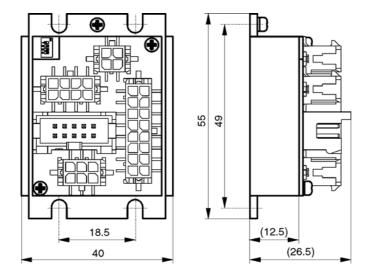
Dimensions EPOS 24/1 for DC/EC motors 302287
